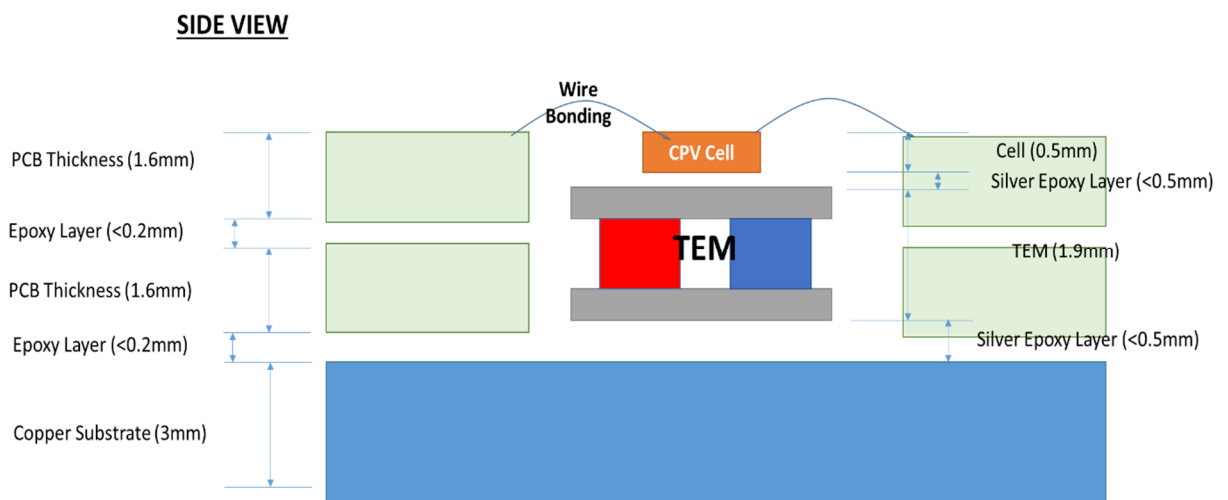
A Side-view Schematic Showing the Necessity of using a Bi-layer PCB for Mechanical Height
